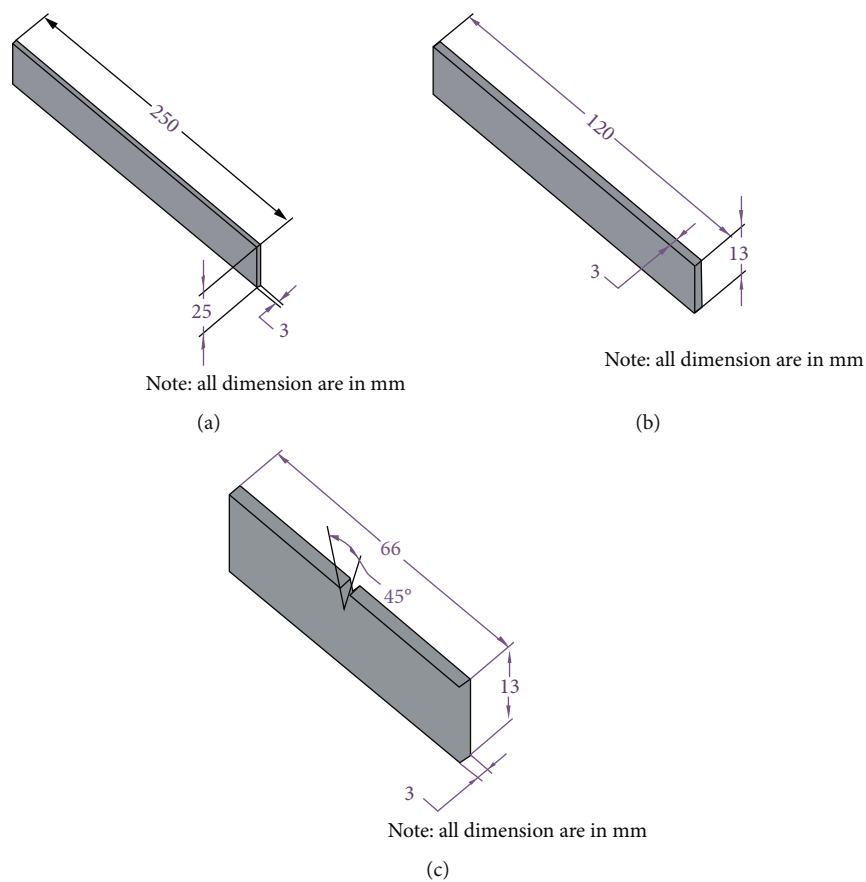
Test samples prepared as per ASTM standards: (a) tensile test specimen; (b) flexural test specimen; (c) impact test specimen.
